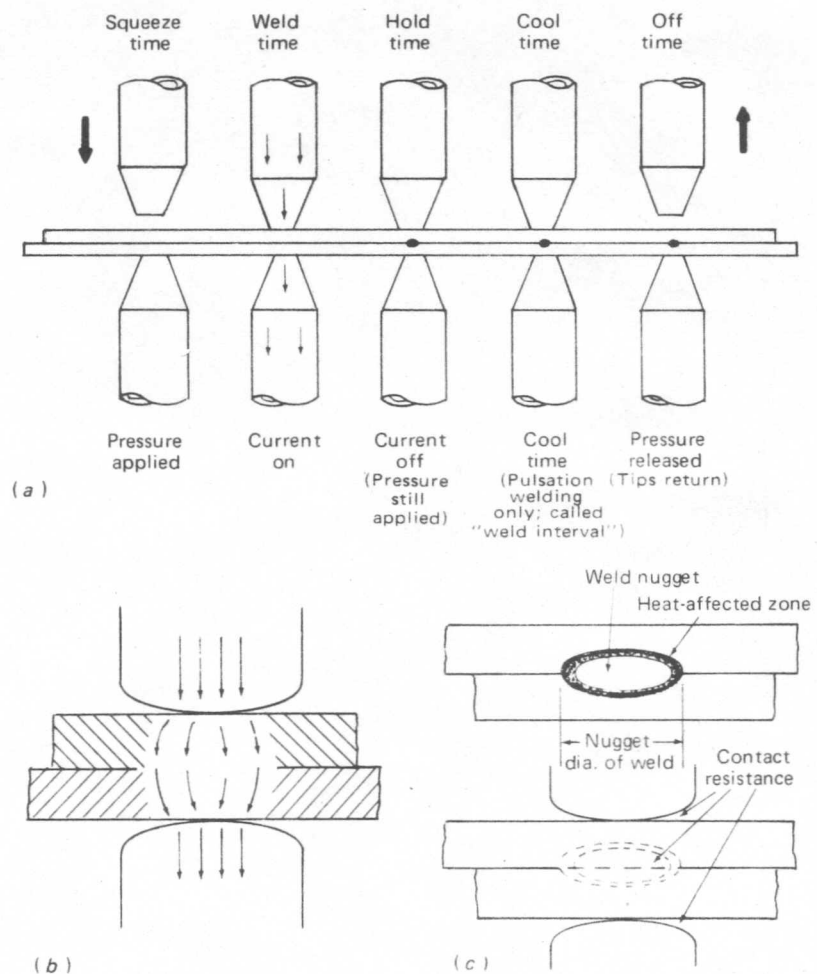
(a) Pictorial sequence of the making of a spot weld. (b) Path of the welding current in a spot weld. (c) Heat-affected zone in relation to weld nugget. (Redrawn from *Resistance Welding, Designing, Tooling and Applications* by W. A. Stanley. Copyright 1950 McGraw-Hill Book Company. Used with permission of McGraw-Hill Book Company.)
